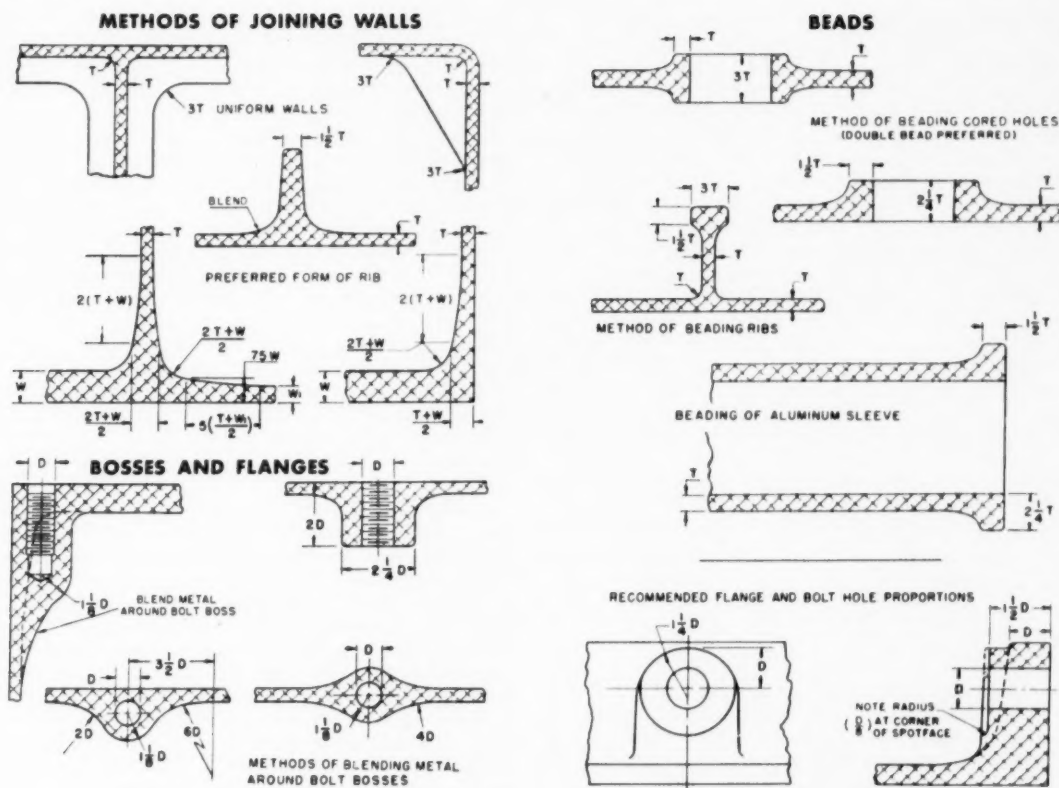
SOME SUGGESTED DESIGN DETAILS FOR ALUMINUM AND MAGNESIUM ALLOY CASTINGS
